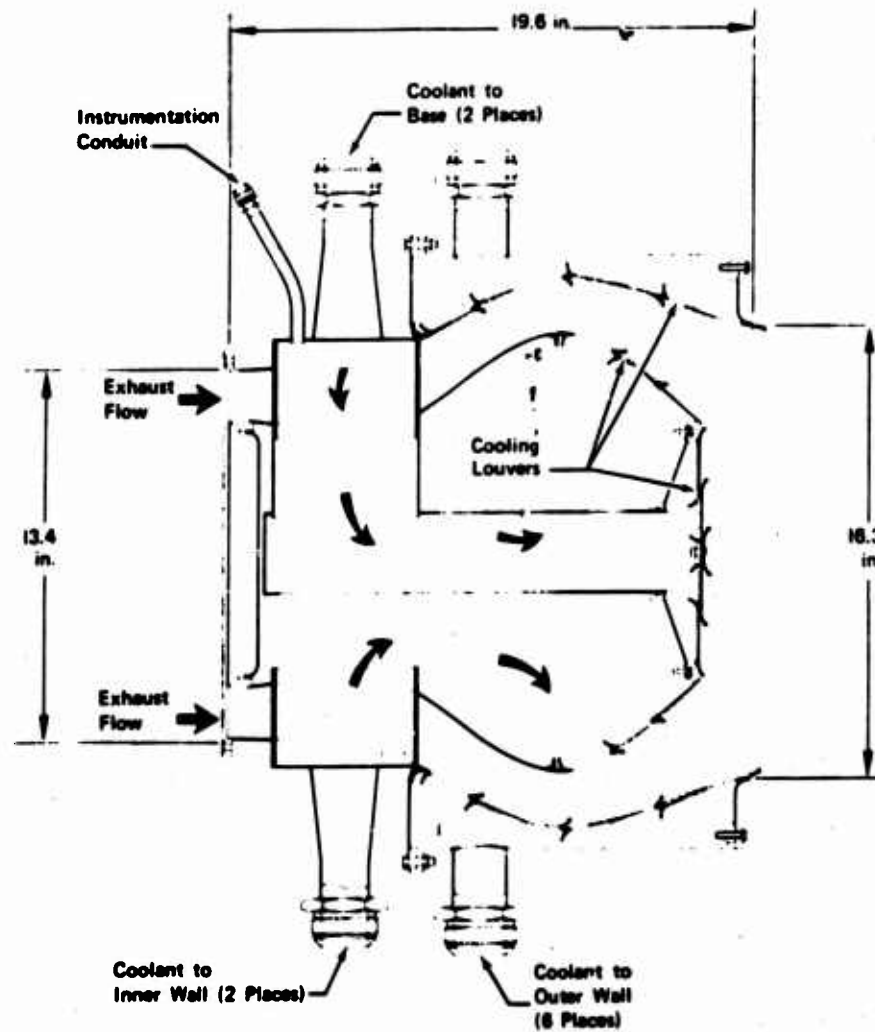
(U) ST9 Demonstrator IR Suppressor Test Rig.
